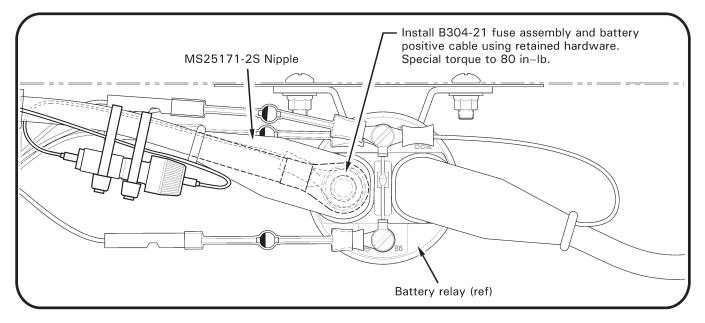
B304-21 Fuse assembly installation (Relay orientation similar for alternate locations)
